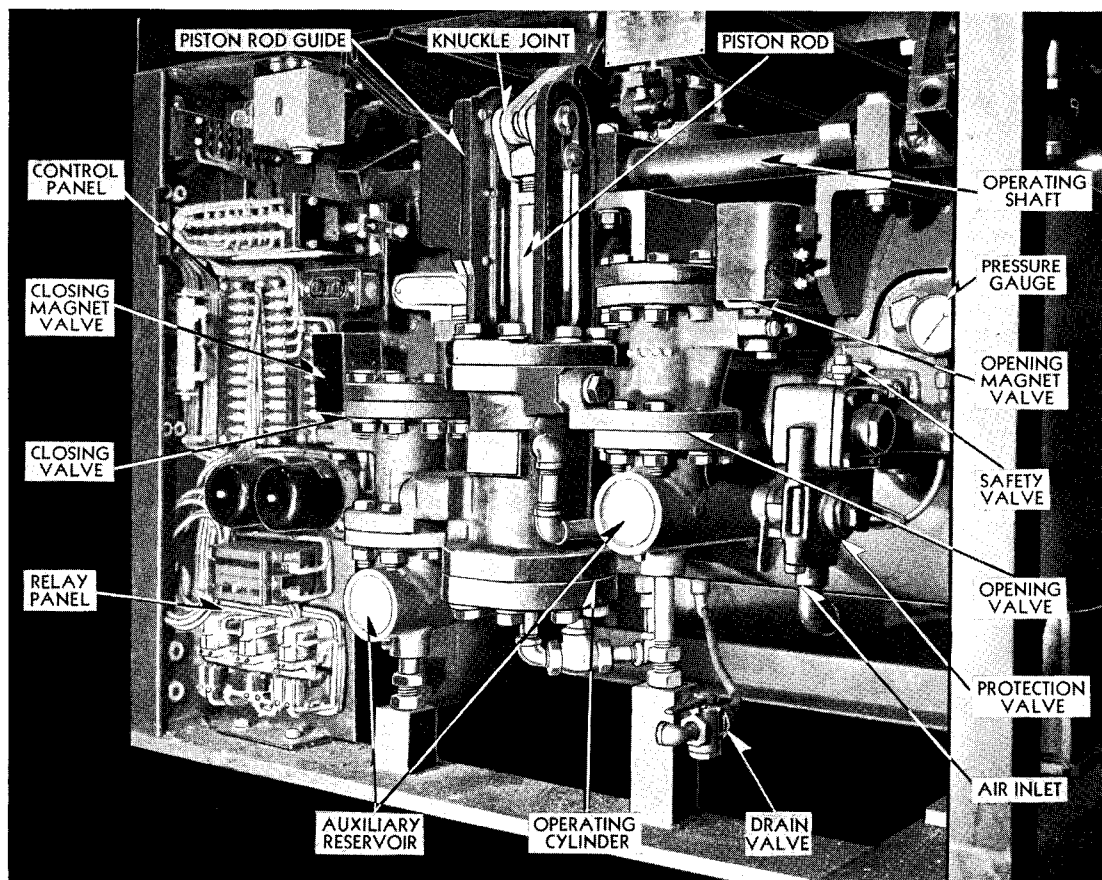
COMPRESSED AIR OPERATING MECHANISM FOR 500,000-KV-A. BREAKER
